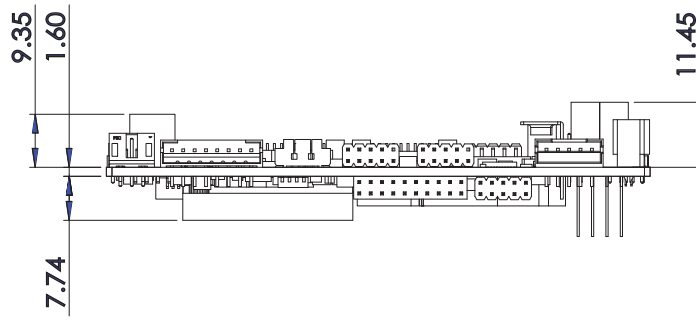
PCM-3365 Mechanical Drawing (Coastline)
